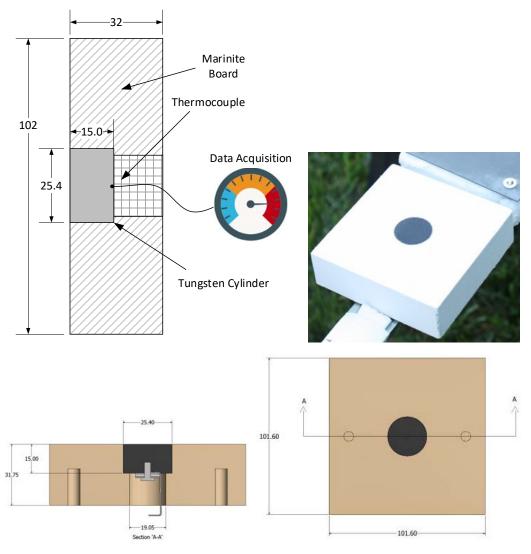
Thermal capacitance style slug, illustration (top left), photo of device being prepared in the field (top right), dimensional drawings showing internal construction (bottom left and right). All dimensions in mm.
